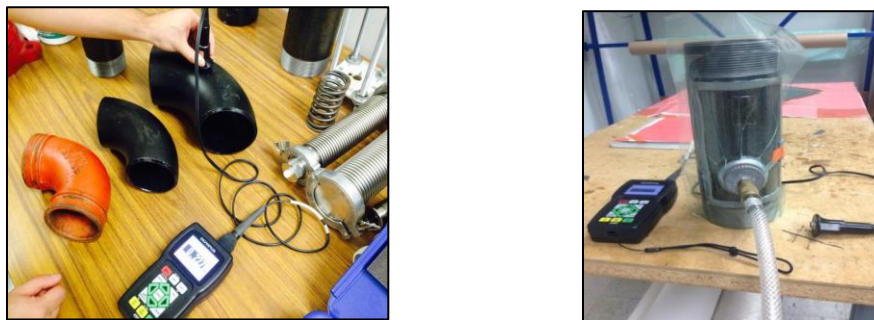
(a) Measurements using the Olympus UT system (b) Vacuum tests [2].
